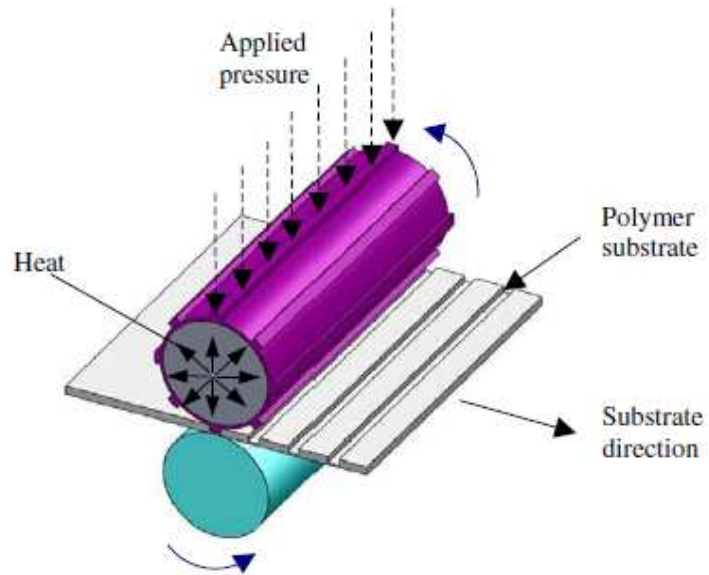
Schematic view of Roll-to-Roll embossing (Yeo *et al.* 2010).
